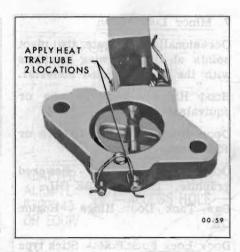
Lubricating Points on Manifold Heat Control Valve – 225, 300 and 340 Cu. In. Engine
